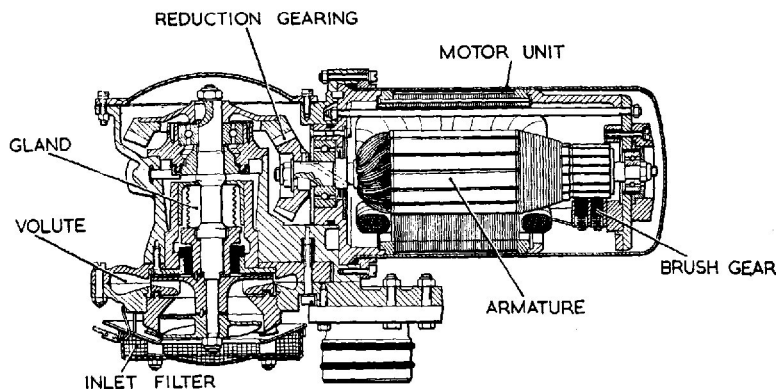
Sectional view of SPE. 1202B Mk. 2A pump
